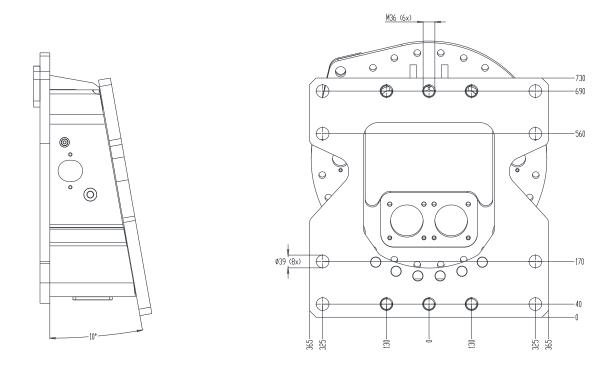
RDP / RDC 25,32 Bolt Hole Mounting Pattern (Allied Family LR9)
